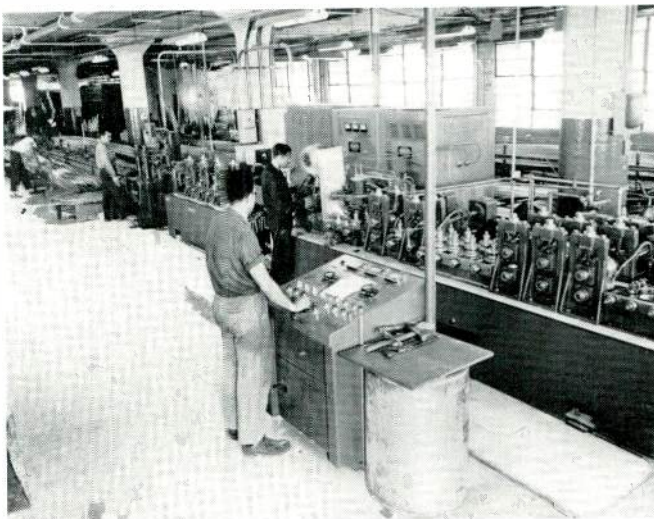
Complete tube mill with Thermatool high frequency resistance welder.
